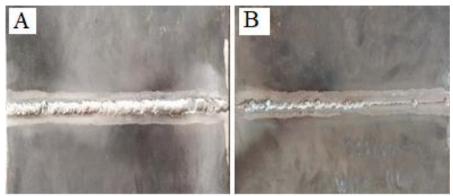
Weld bead of GTAW on ST 37 (a) Face (b) Root
